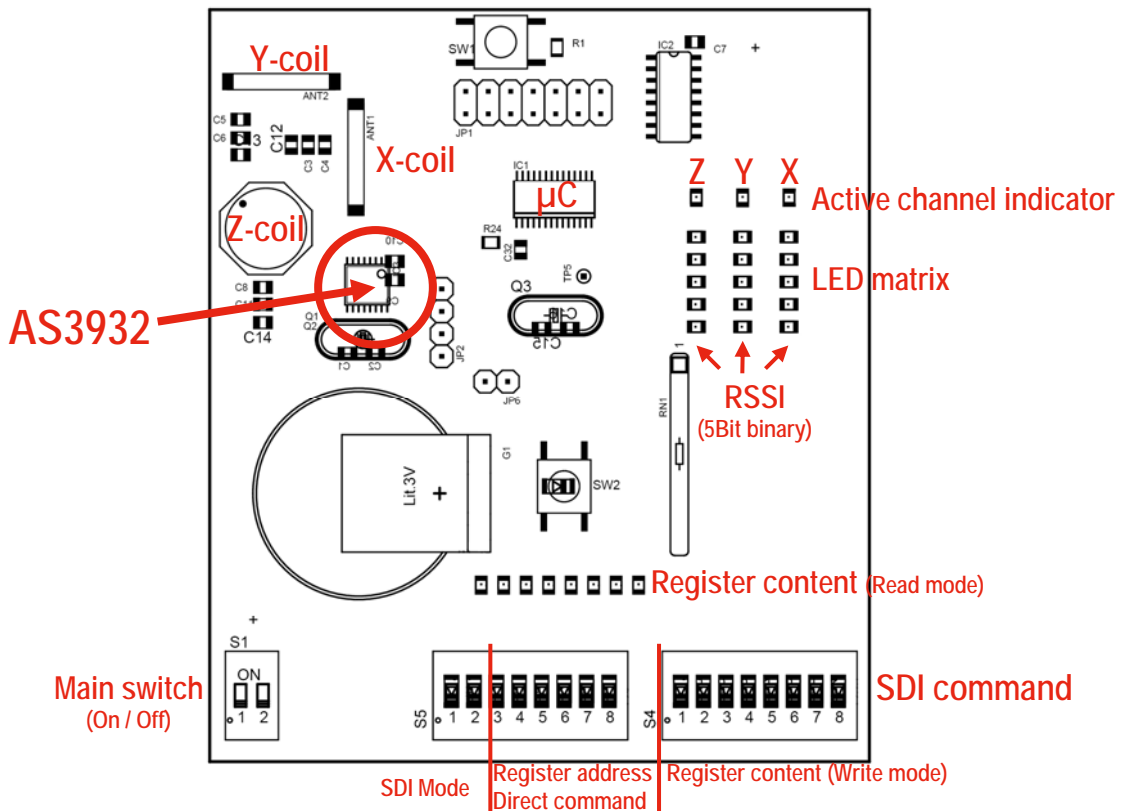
top view of the AS3932 LF Wake-up Receiver development board
